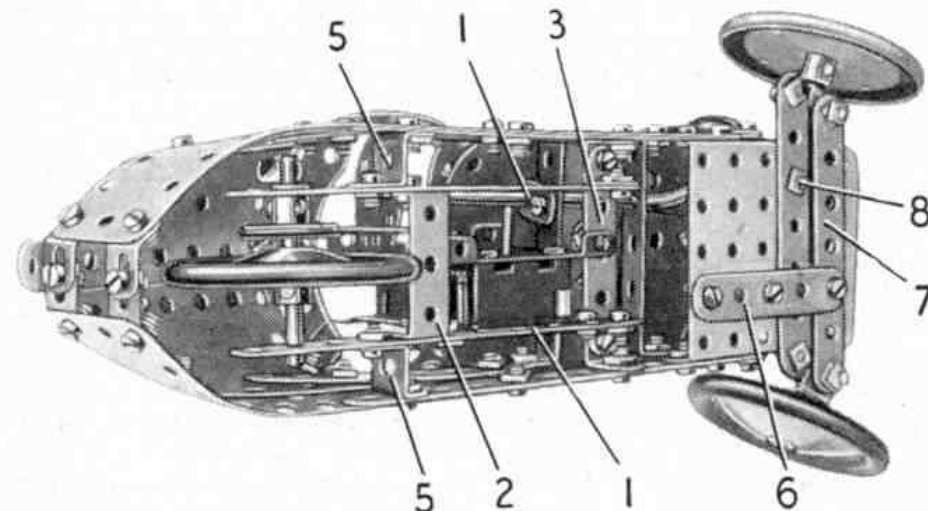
An underneath view of the car that shows how the Motor is fitted, and the steering mechanism.
